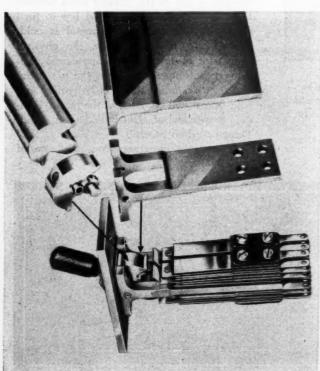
Contact base of Fig. 2 is shown here (arrow) in position on final assembly of locomotive controller
